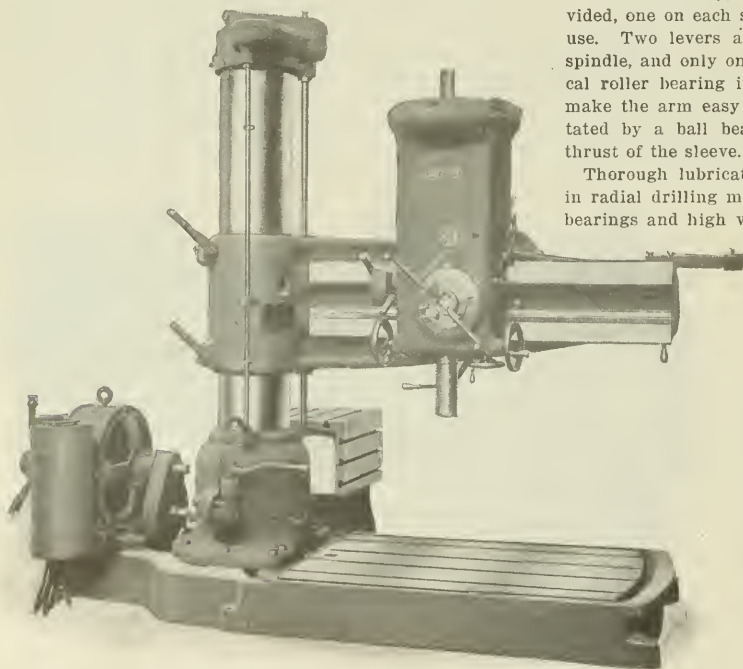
American "Triple-purpose" Radial Drilling, Tapping and Boring Machine
